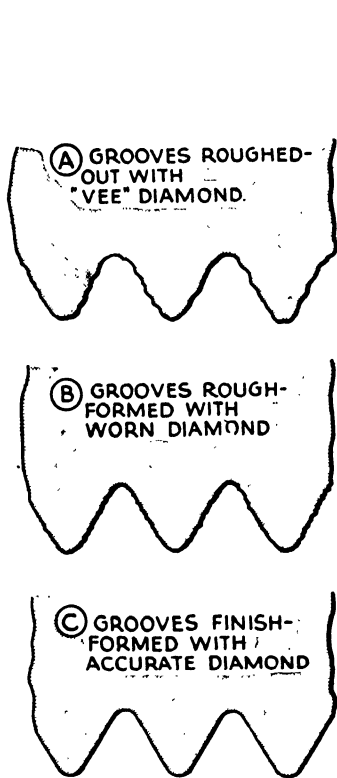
STAGES IN FORMING AND FORM-DRESSING A MULTI-RIB WHEEL
